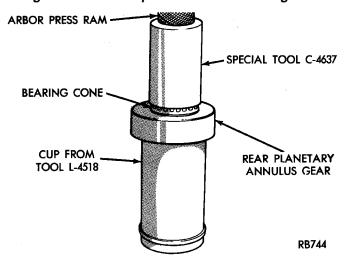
Install Rear Planetary Annulus Gear Bearing Cone
